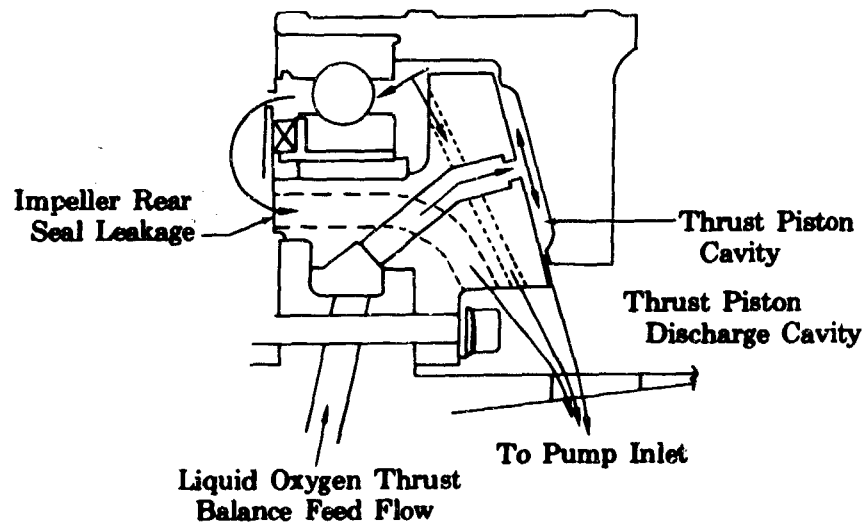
Oxidizer Turbopump Front Bearing Coolant FD 33097
